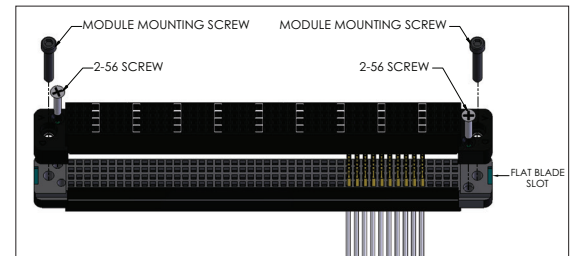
Figure B. Open both sides of the module simultaneously or pins could be damaged.
